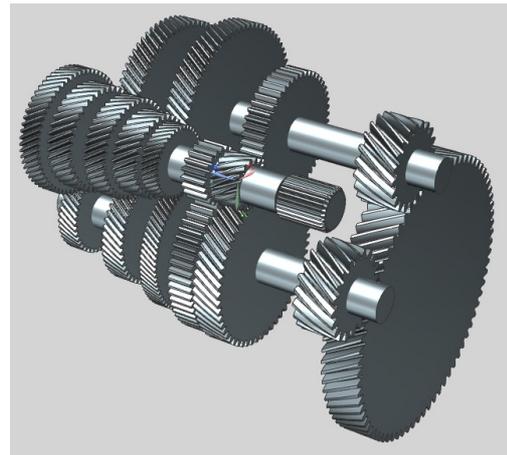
3D CAD model of 3SG-6G gearbox at geometrical level.
